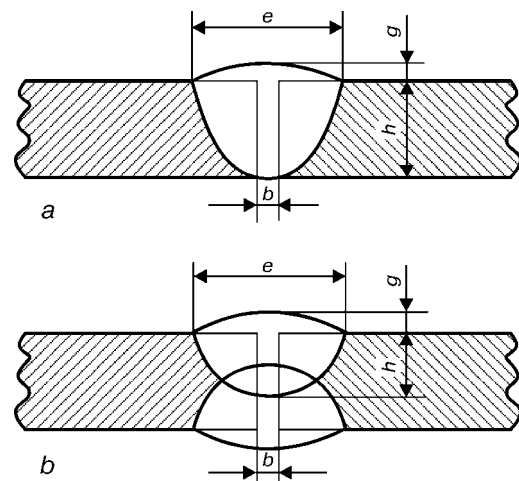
Dimensions of a weld in a square-butt welded joint: *a* — one-sided weld; *b* — two-sided weld
